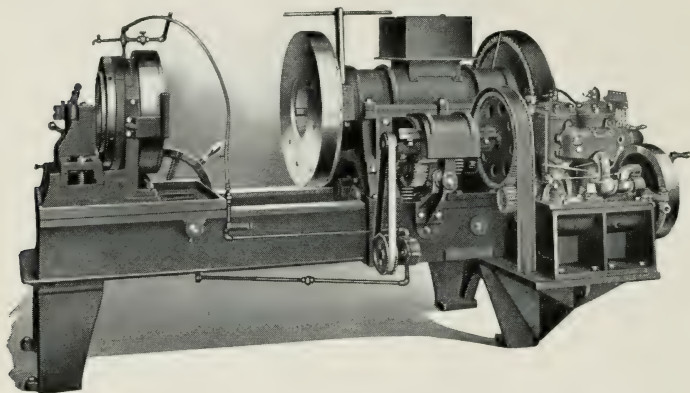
PIPE CUTTING AND THREADING MACHINE WITH GAS OR GASOLINE ENGINE ATTACHED
